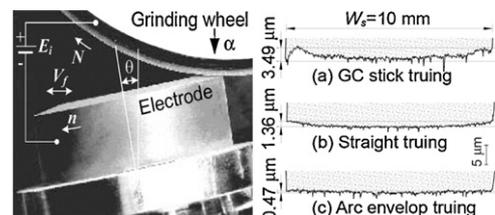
Arc enveloped truing with conical cup dresser and the result on the cylindrical profile of a grinding wheel [220].
